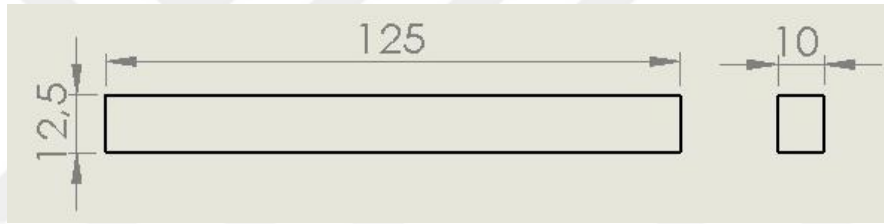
Technical drawing of Charpy impact test samples (dimensions in mm)
